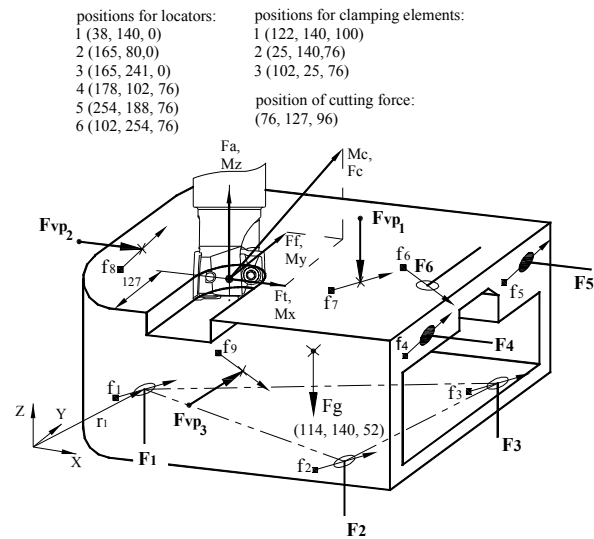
Forces on a prismatic workpiece during machining of a slot
